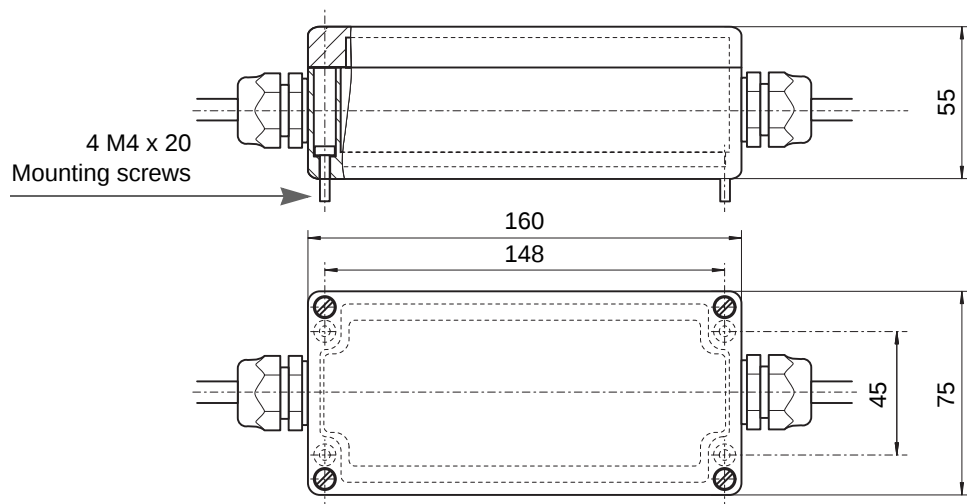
Mounting dimensions for a ABA 160 industrial housing
